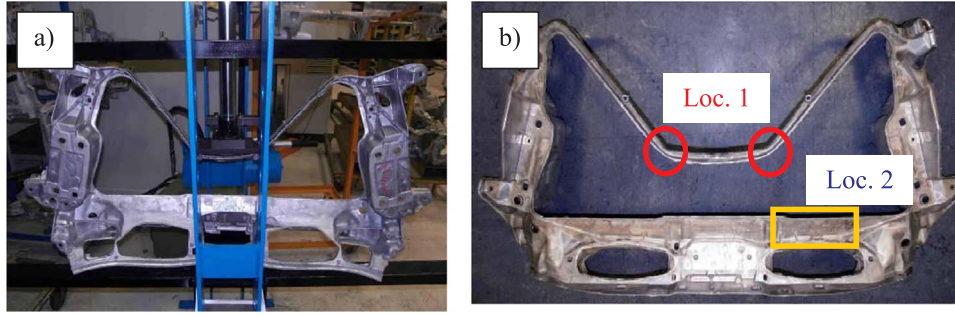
AM50 alloy HPDC front end carrier industrial component used to test the deflection to failure: a) testing set-up and b) example of crashed component [31].
